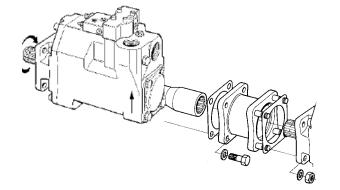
Adaptor kit (P/N 379 7795) for tandem coupling.
